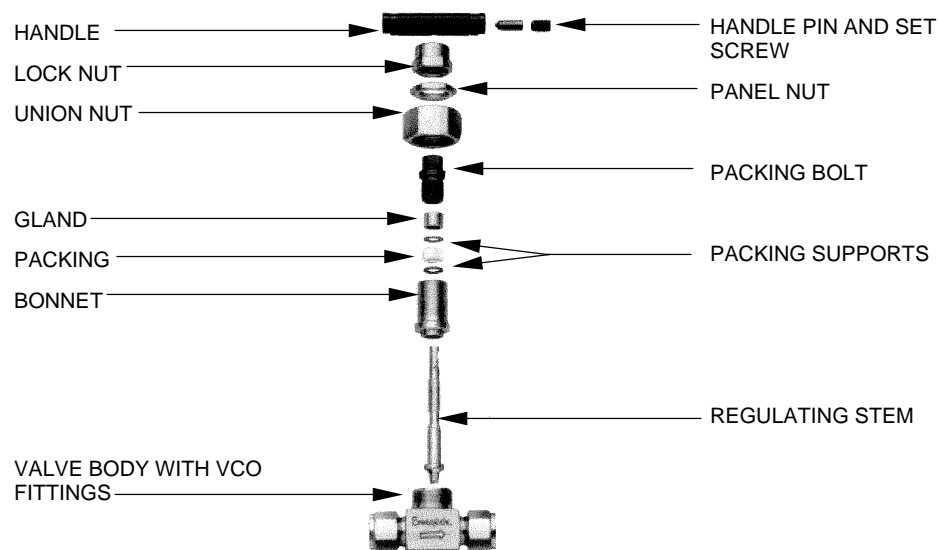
HP O₂ External Supply Shutoff Valve (Model M-6NRVCO8-M)
